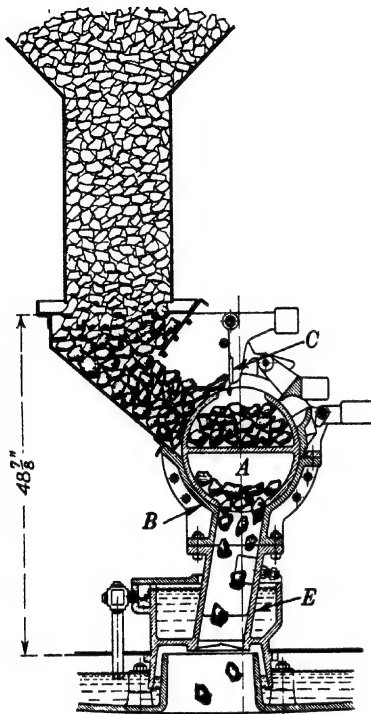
COAL FEED FOR MORGAN GAS MACHINE.
